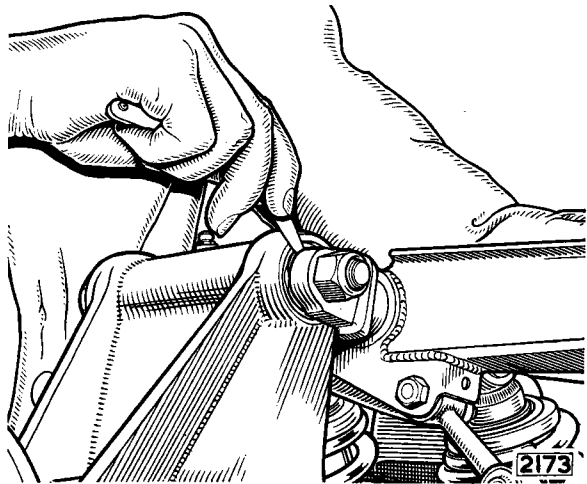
Using feeler gauges to measure the clearance between the hub carrier oil seal tracks and wishbone forks
